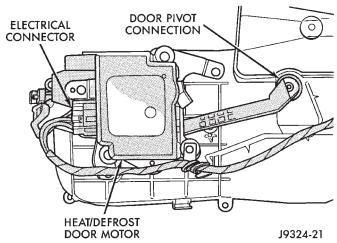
Heat/Defrost - Panel/Defrost Door Motor
